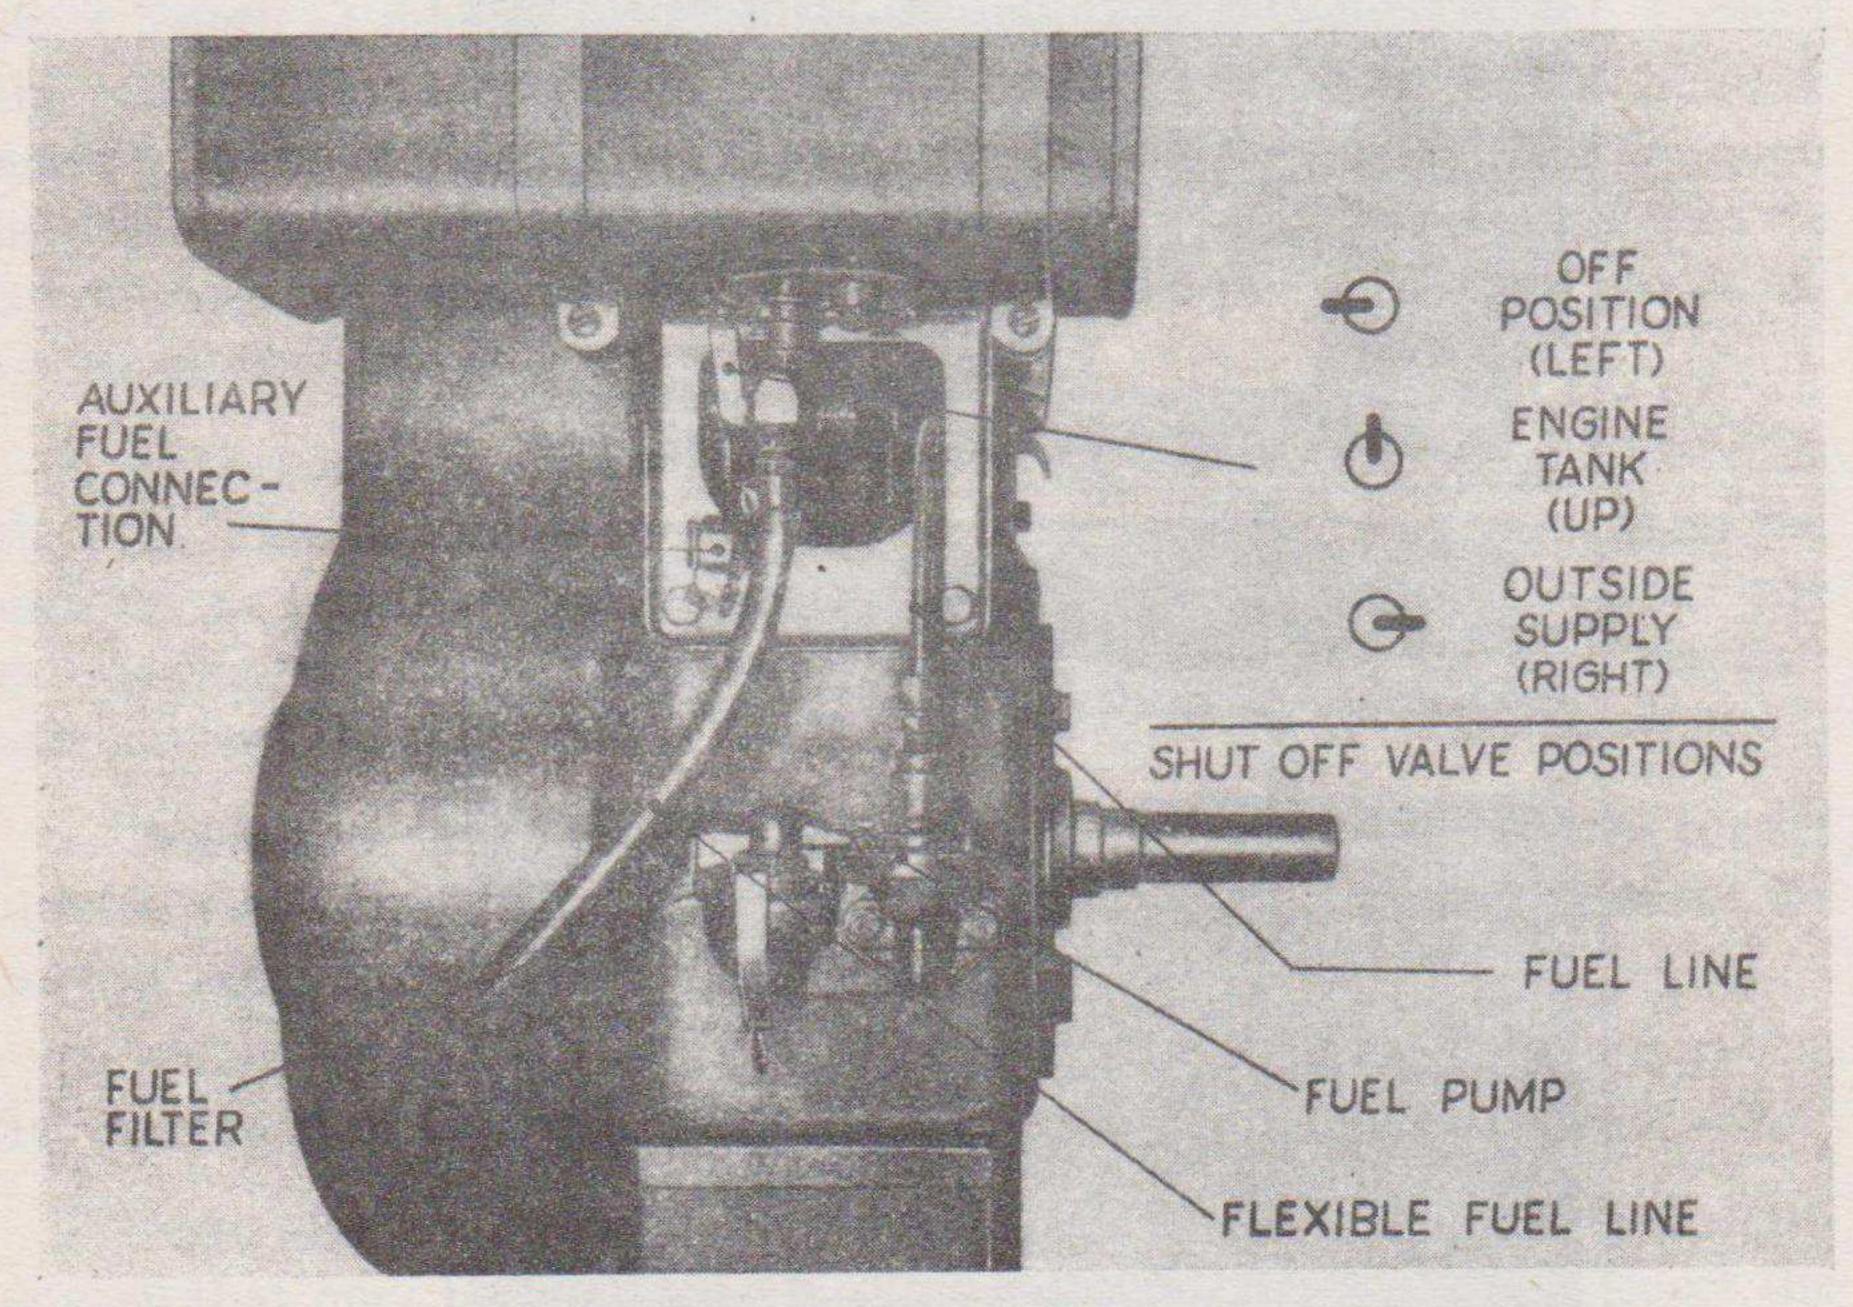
Power Unit PE-75-AF-GY, fuel supply assembly.
